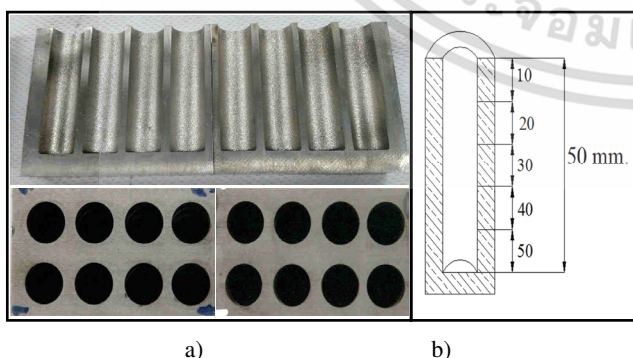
a) AISI P20 tool steel workpieces after deep hole machining.
